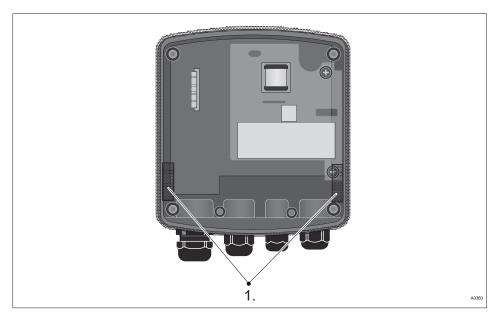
Fitting the profile seal on the bottom section of the controller housing
